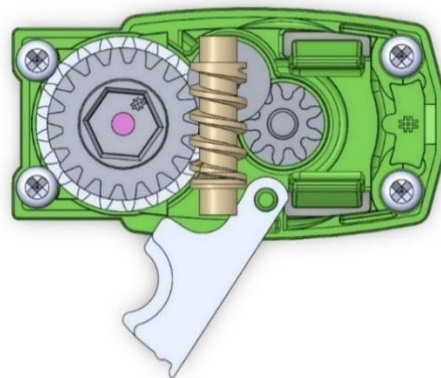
Upper view of the upper head-box head with gears visible.
